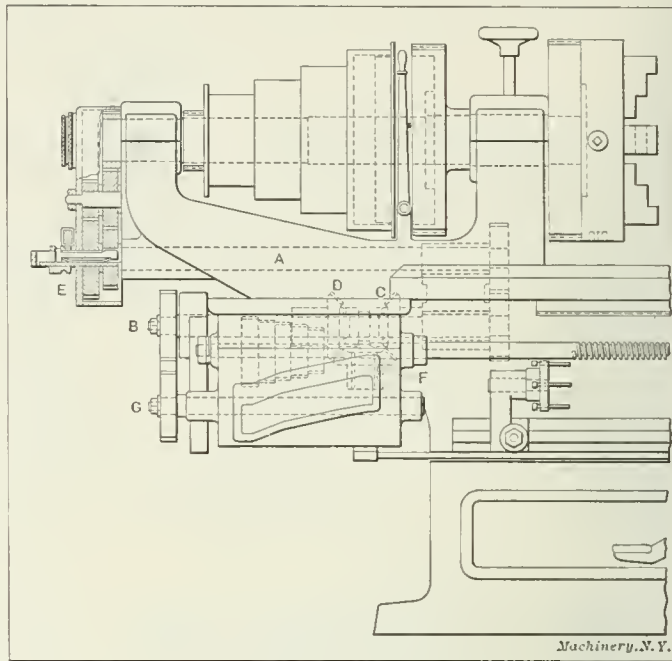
Detail showing the Feeding and Reversing Mechanism
